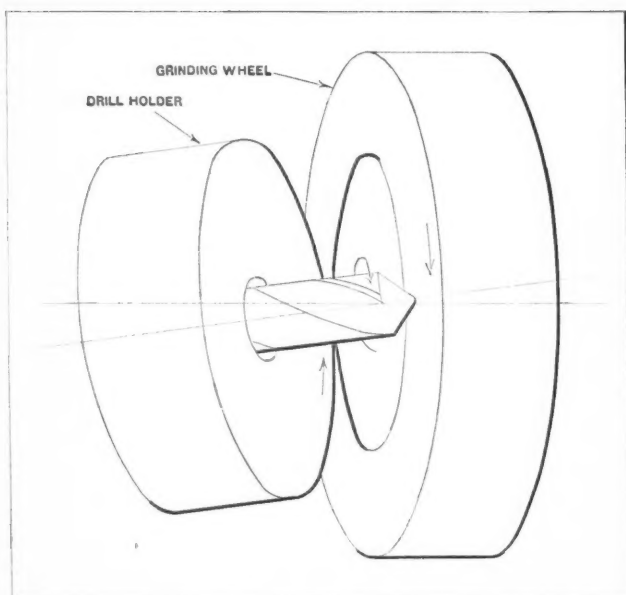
Diagram Showing Relative Positions of Drill-holder and Grinding Wheel
